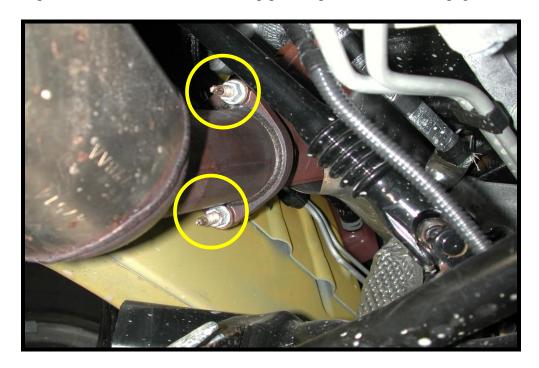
Removal of Downpipes from Factory Manifold (5.7L Hemi Shown)
